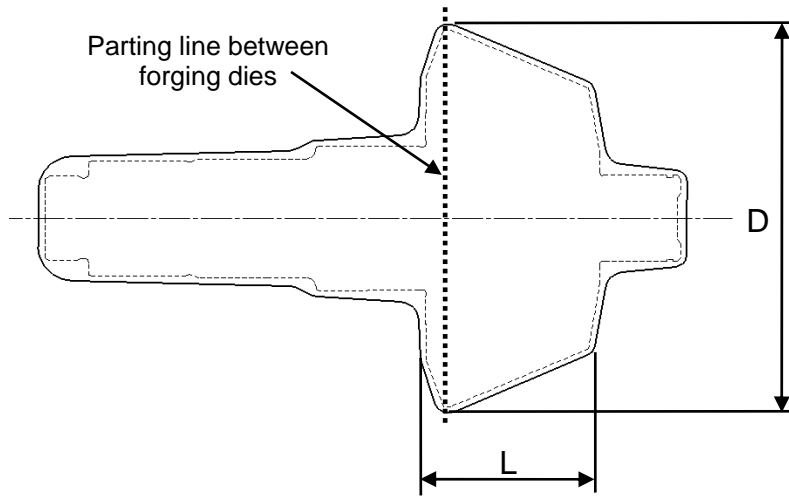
Representative tolerances for a pinion forging with a weight of approximately 25 kg:
